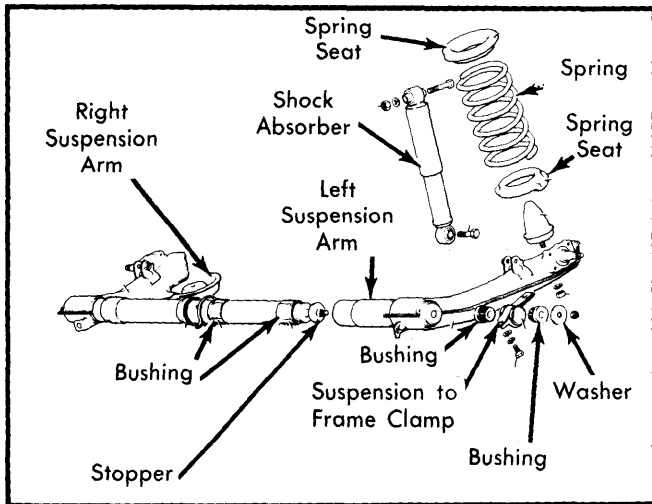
Exploded View of Champ & Colt FWD Rear Suspension
